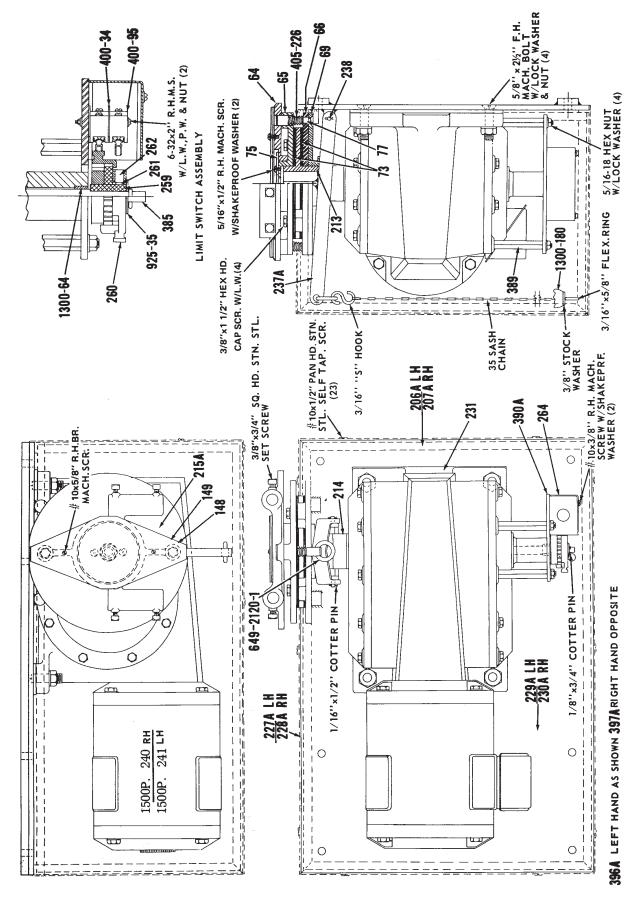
Illustration of Parts - Extra Heavy Duty 1 HP
